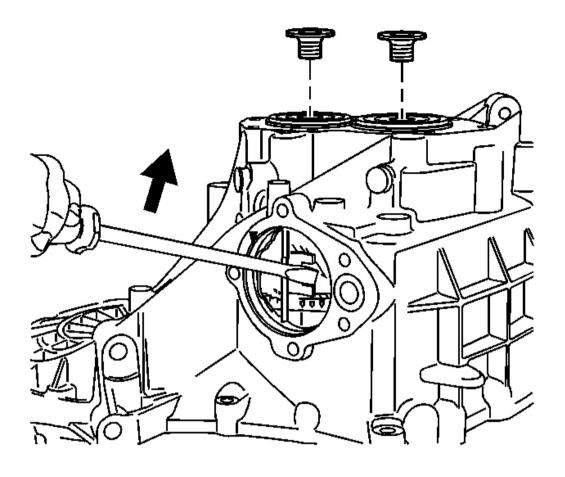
Shaft Bolts & Transmission Courtesy of GENERAL MOTORS CORP.
